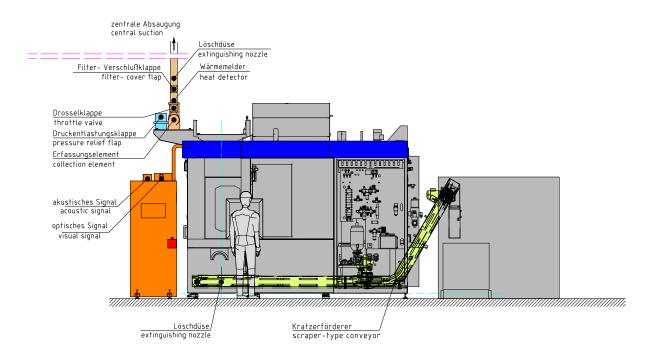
Schematic diagram; protection concept for neat oil machining (non water-miscible MWF), machining centre for automatic loading and unloading of workpieces
